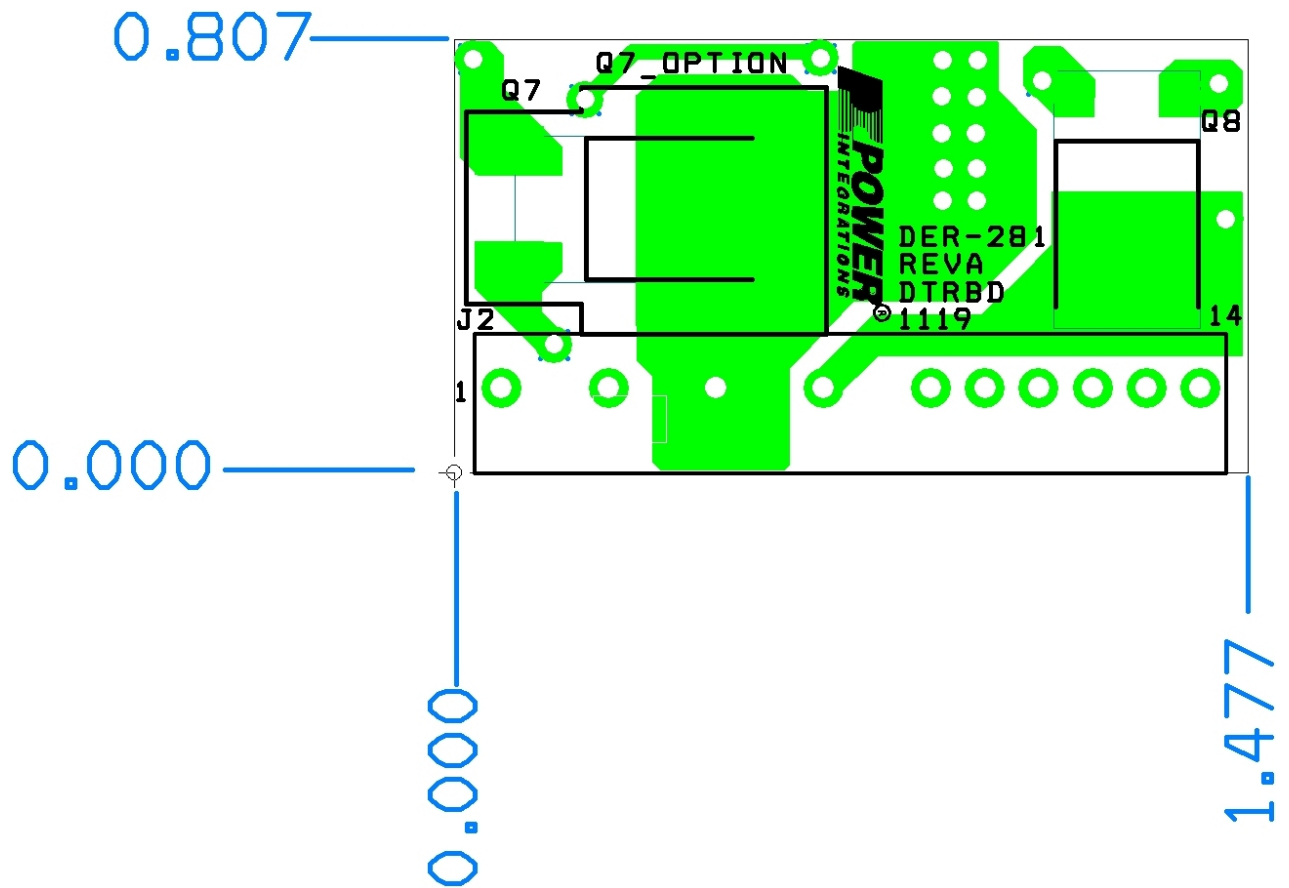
Printed Circuit Layout, Top Side (Daughterboard).
